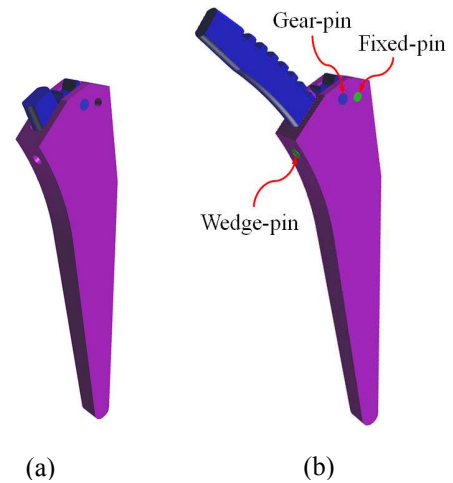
Assembled mechanical stem : (a) initial state, (b) final state
